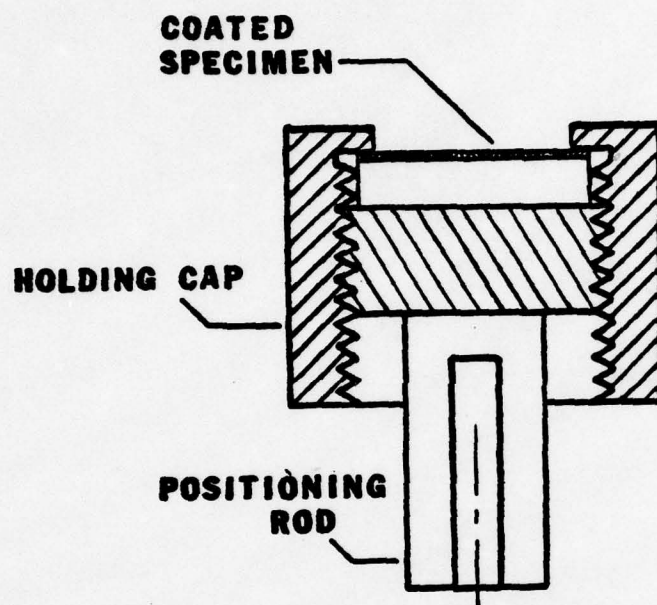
Cross sectional view of coated piece and positioning fixture.
